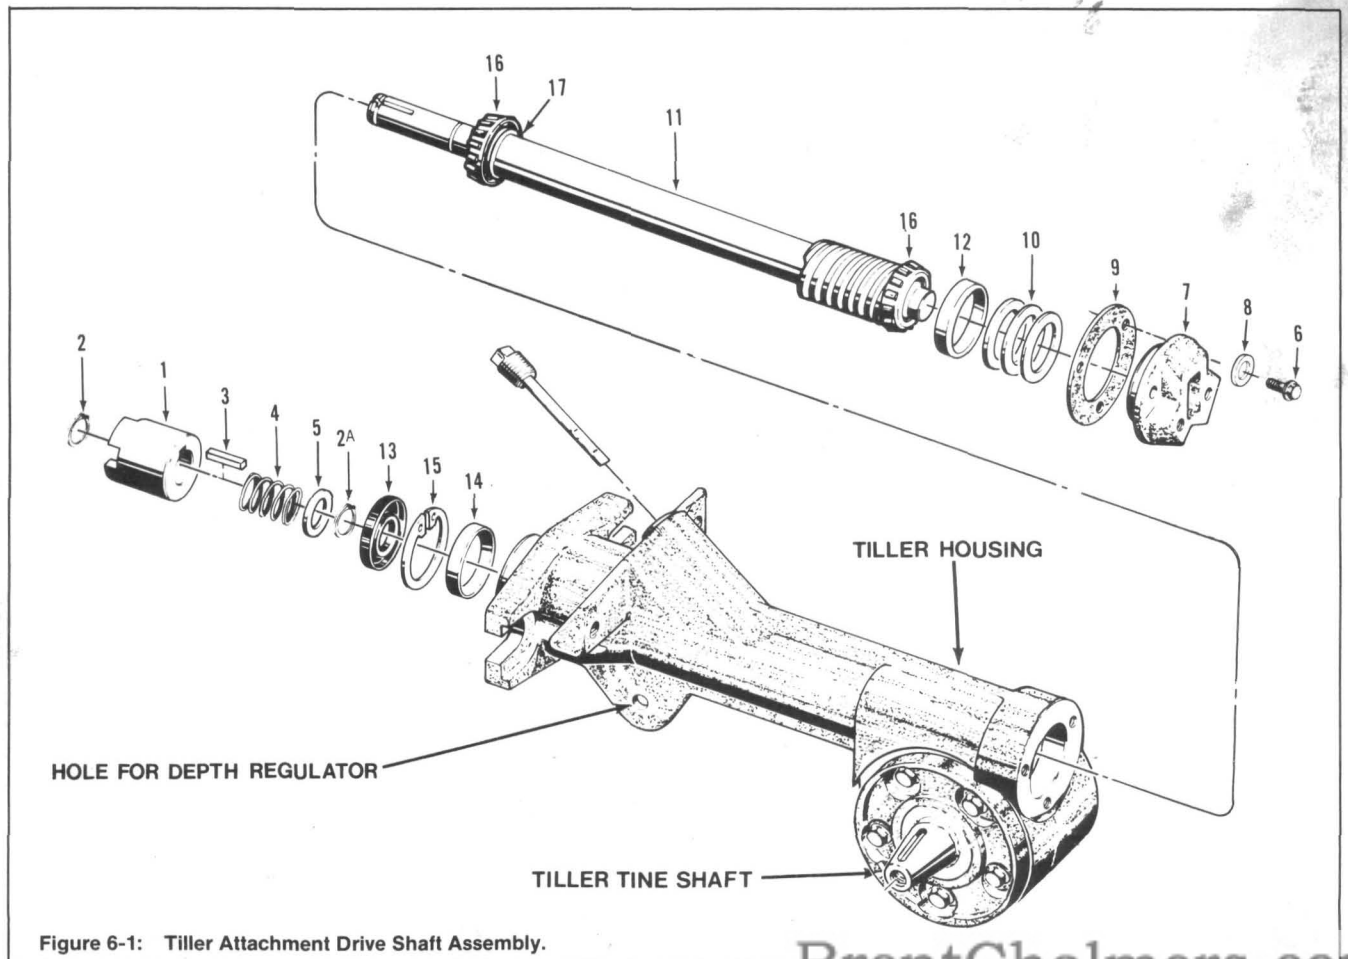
Tiller Attachment Drive Shaft Assembly.
